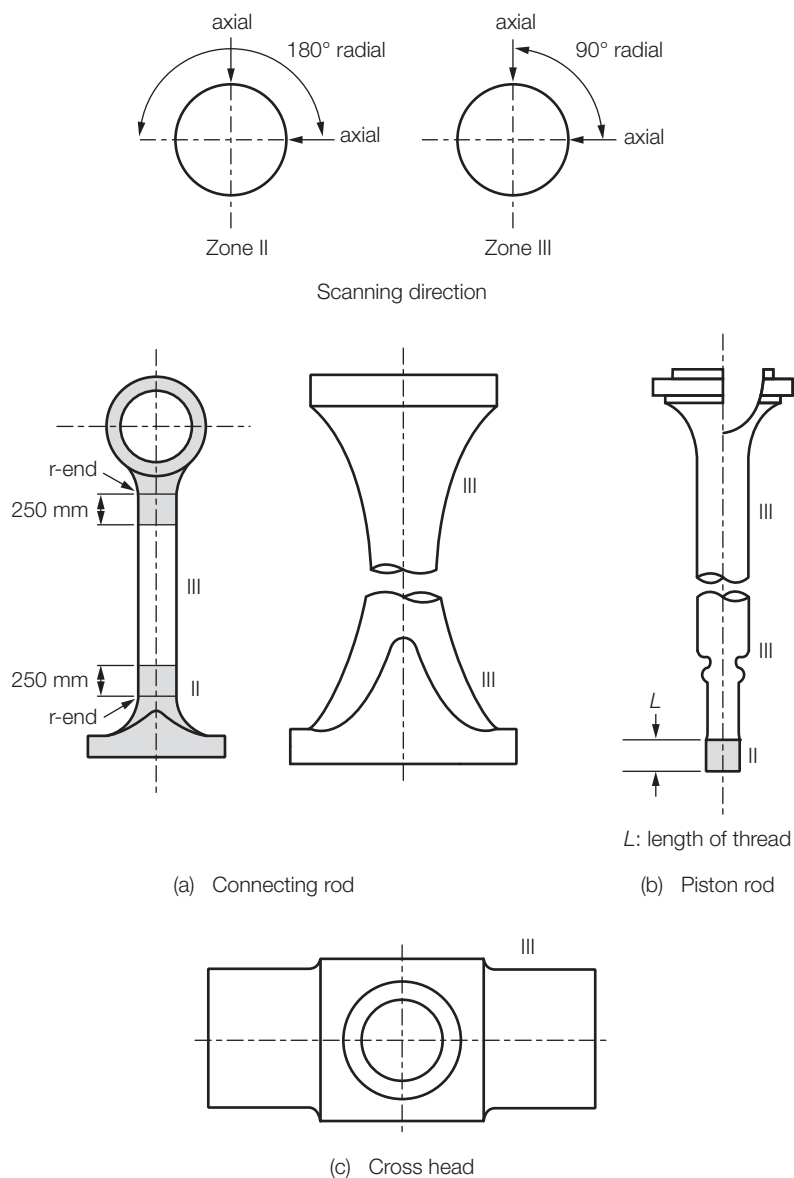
Zones for magnetic particle/dye penetrant testing on machinery components
